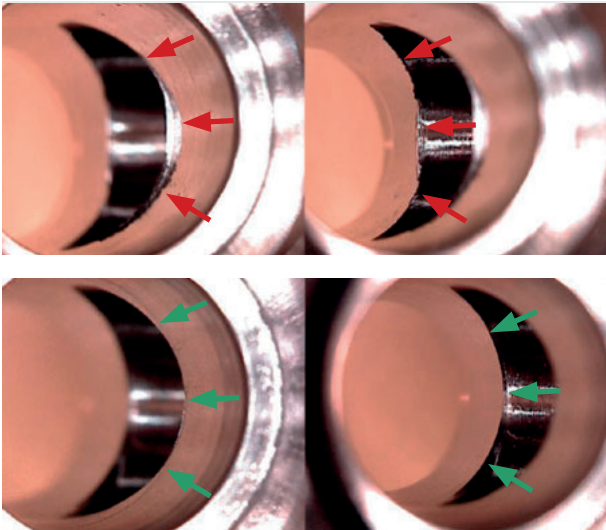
Top row: Before deburring. Bottom row: After deburring. The bore edge is clean and completely free of burrs.
